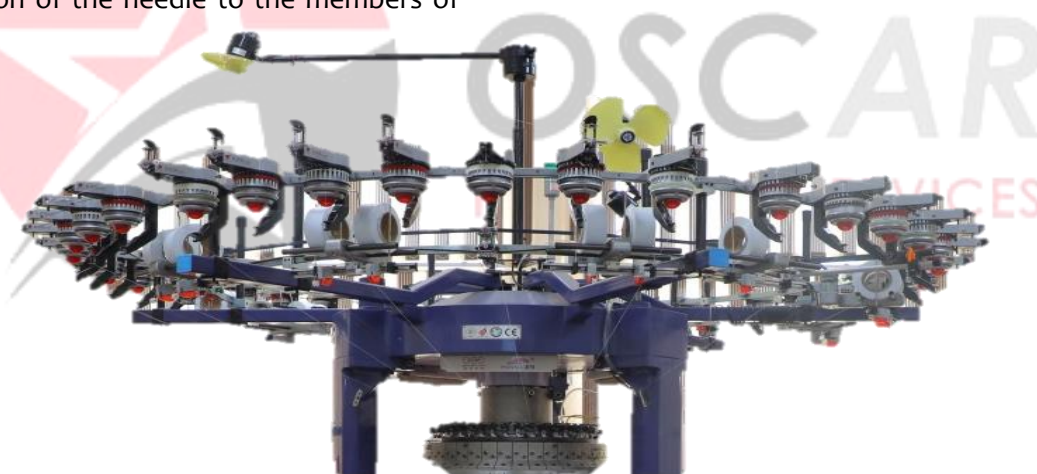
Threading system. 1-spool, 2-automatic threading mechanism, 3-device for supplying lycra yarn, 4-cross, 5-belt, 6-pulley, 7-belt tensioning device.
